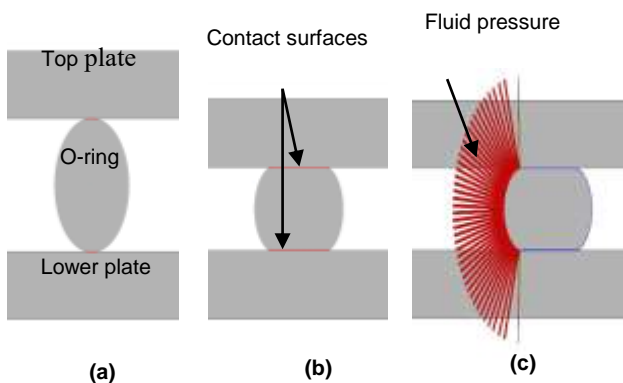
(a) Mounting the O-ring between two plates. (b) Compression of the O-ring. (c) Application of fluid pressure
